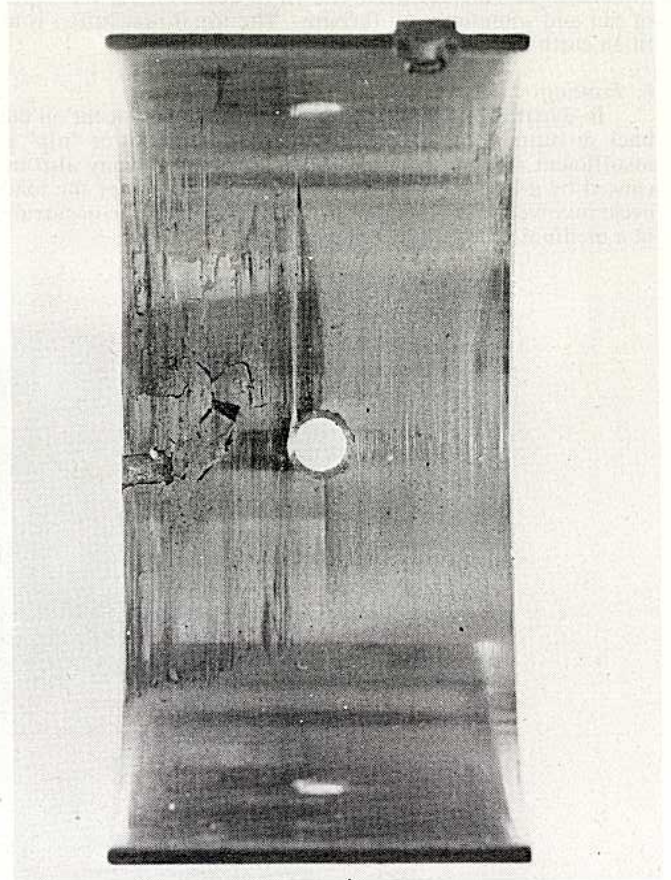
Fatigue cracking of 20 per cent tin-aluminium lining due to edge loading caused by shaft deflexion
